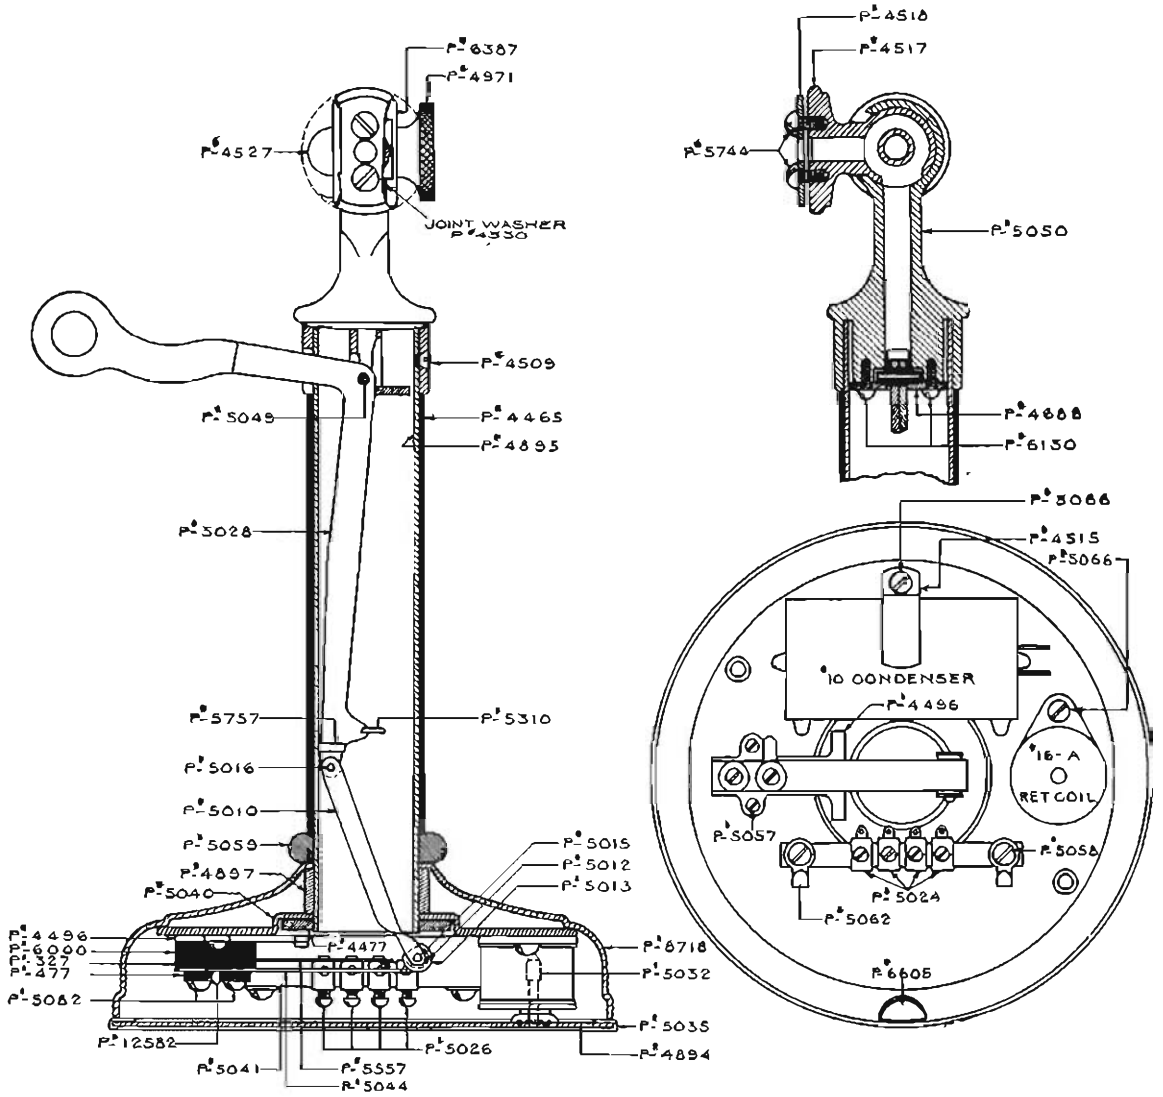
Old Type Nos. 28 and 39 Desk Stand
